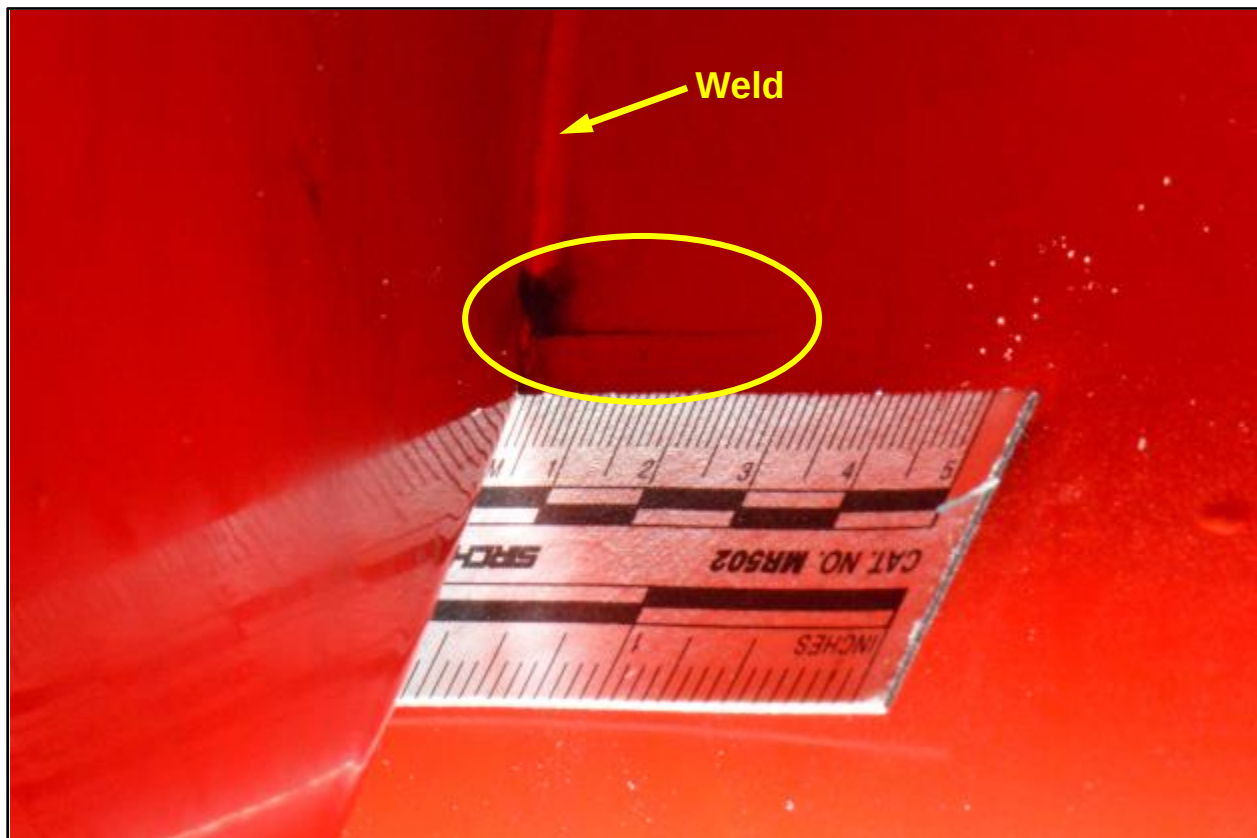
Appearance of the weld (yellow arrow) and the crack perpendicular to the weld (yellow circle).
